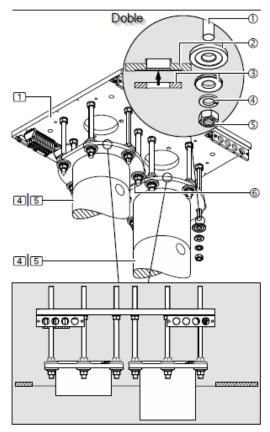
Assembly of the roof tube flange on the threaded bolts
